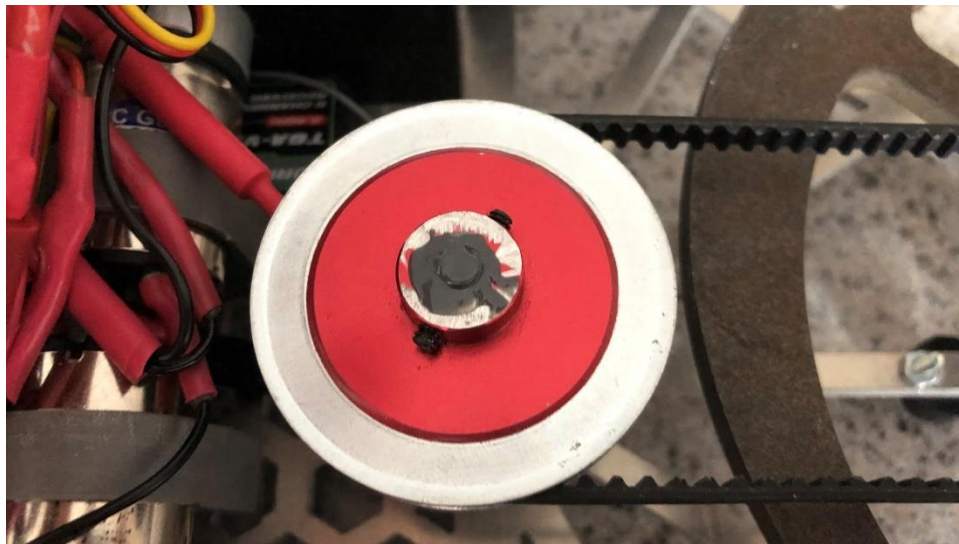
JB Welded Pulley onto AC Motor Shaft
